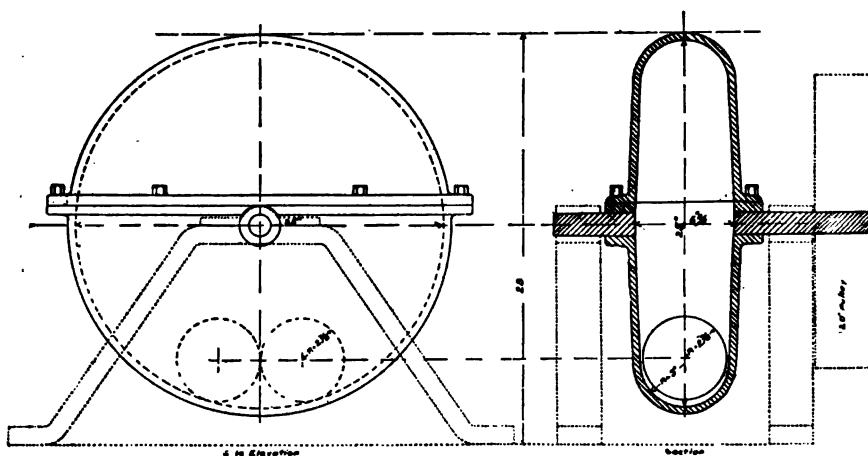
Sketch of ball-mill for making stone dust for the cementation test of macadam materials.
